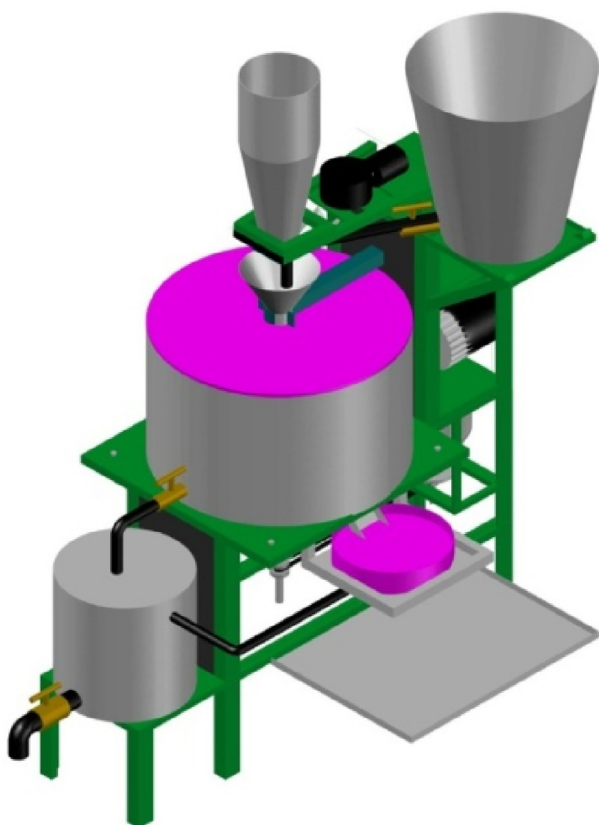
AutoCAD drawing of the automated grain drinks processing machine.
